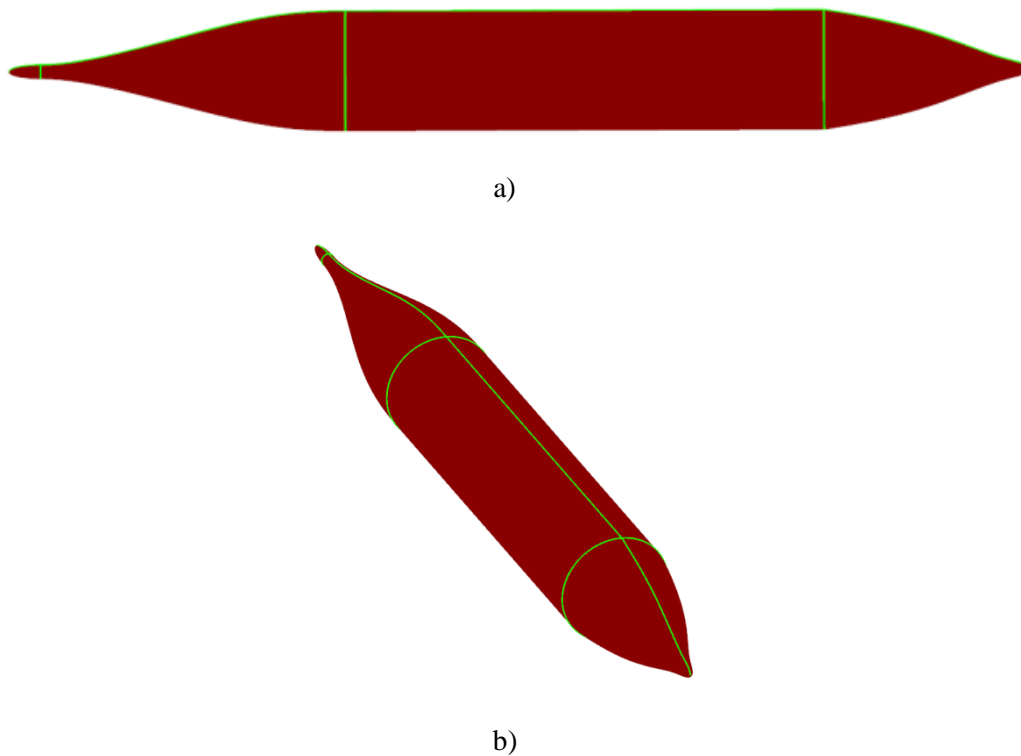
Optimum Design-1 a) Section View b) Isometric View
